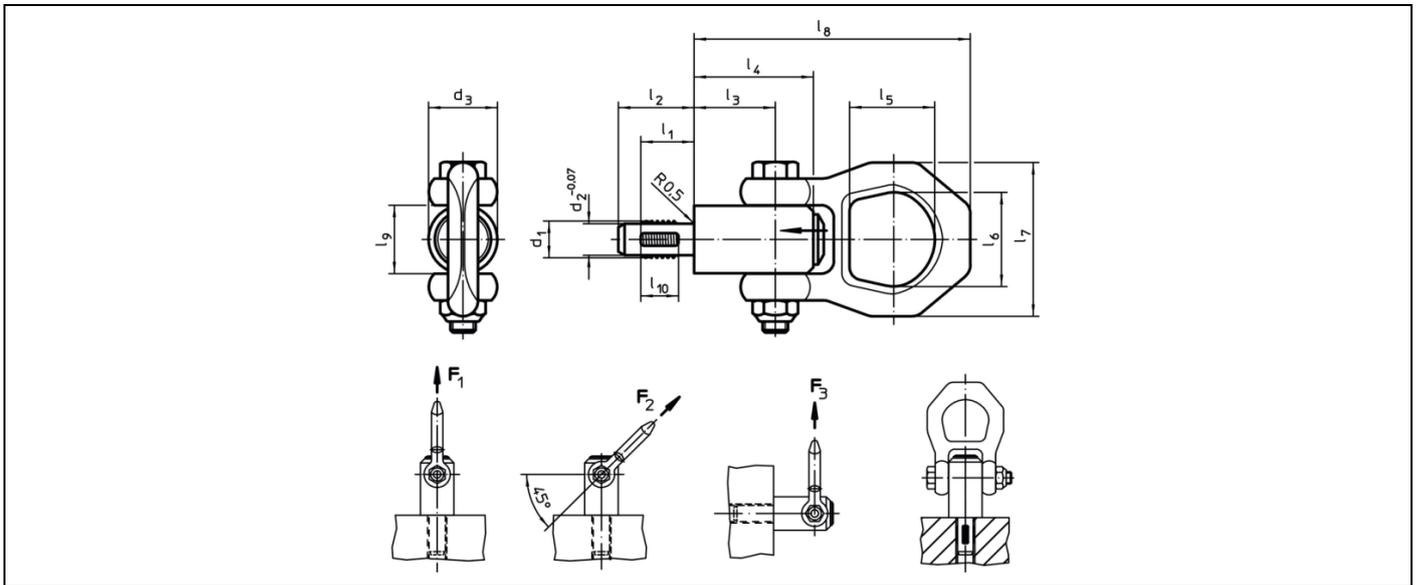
Dimensioned drawing - threaded lifting pins, self-locking - EH 22352
